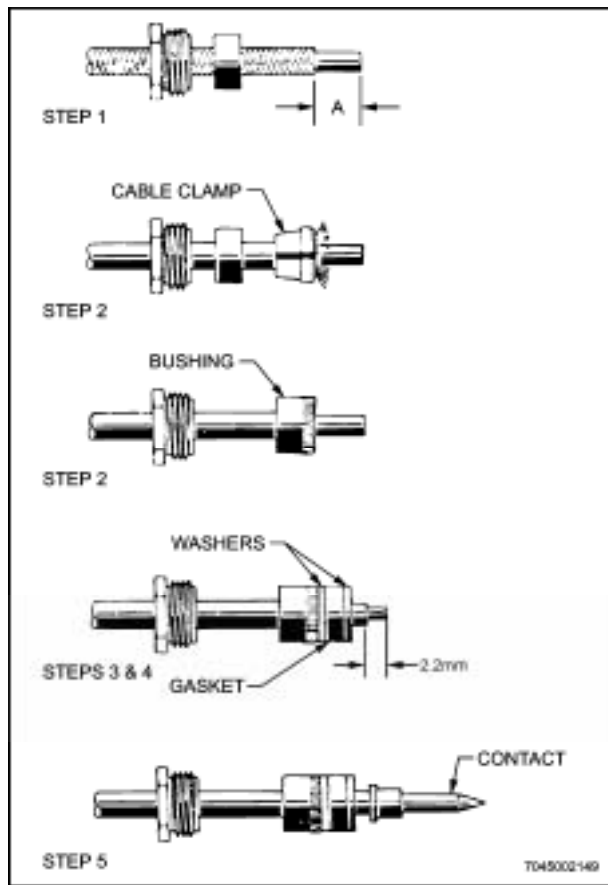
Attaching Liquidimeter S62 and S63 Series Connectors to Coaxial Cable
